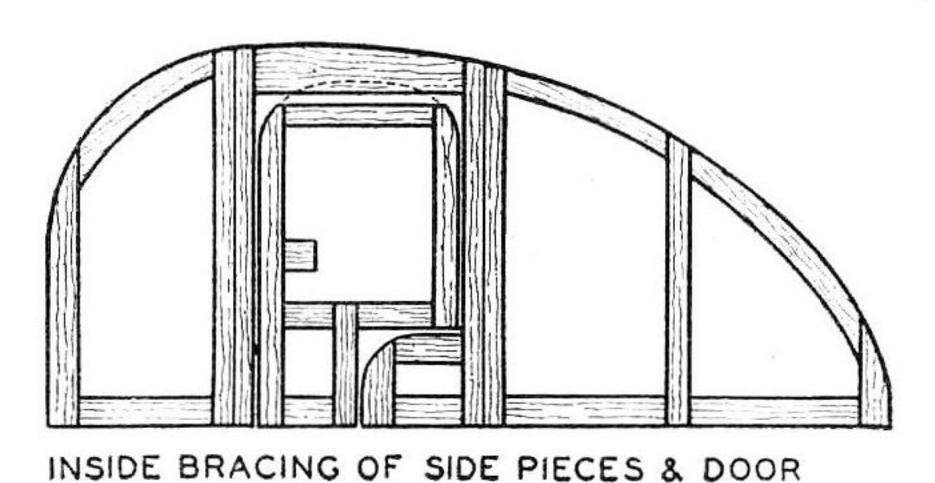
The thin wooden sides will require some sort of braces. This shows a suitable arrangement.
